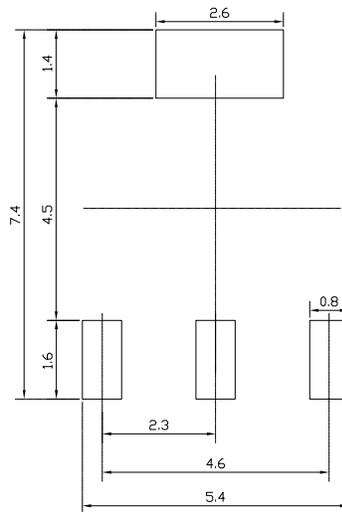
SPX2945 Mechanical Dimensions–3-Pin SOT-223
